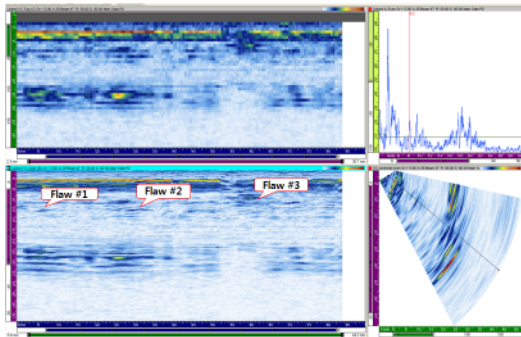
Signal analysis result of 3/4" socket weld flawed specimen
